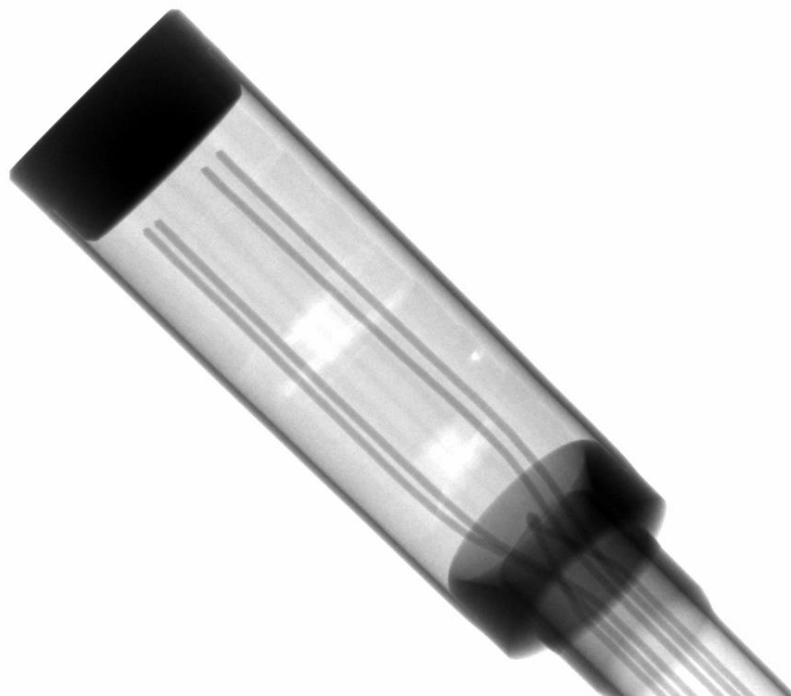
HT MPFD thermocouple placement in final assembly [15]
